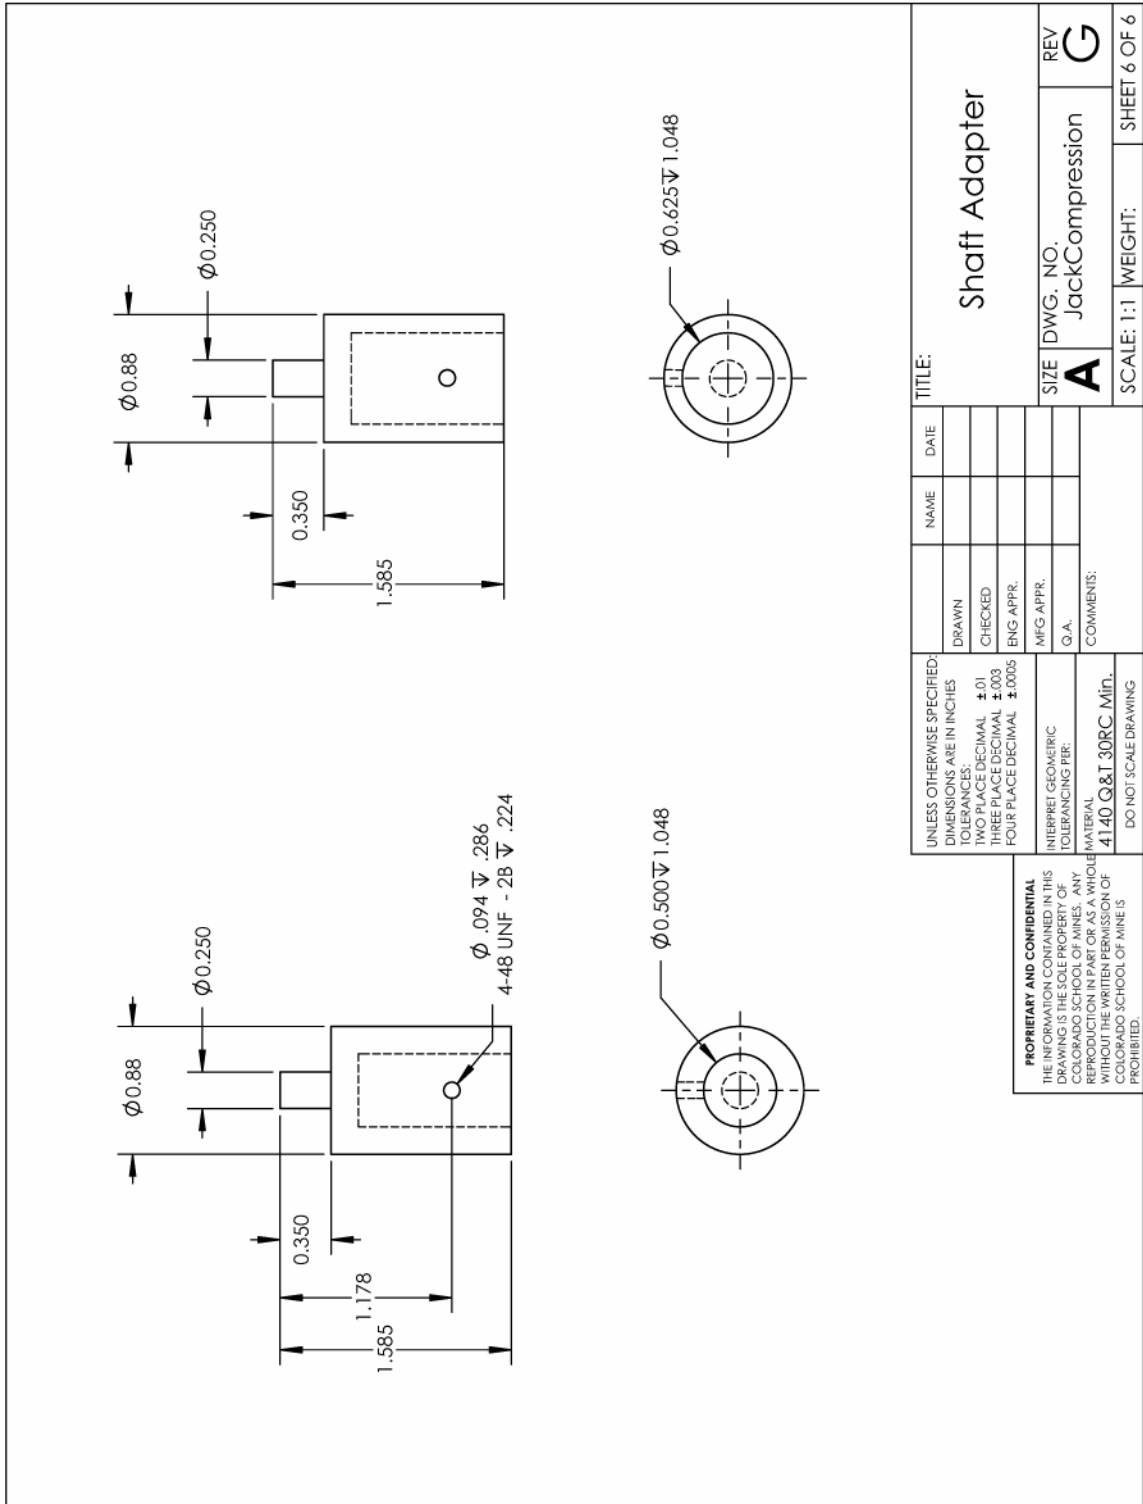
Shop drawing of shaft adapters. The adapters allowed the flexible shaft to connect to the screw jack and the drive motor.
